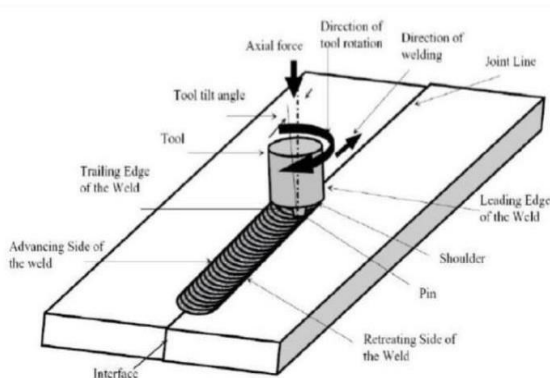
Schematic Diagram of Friction Stir Welding
